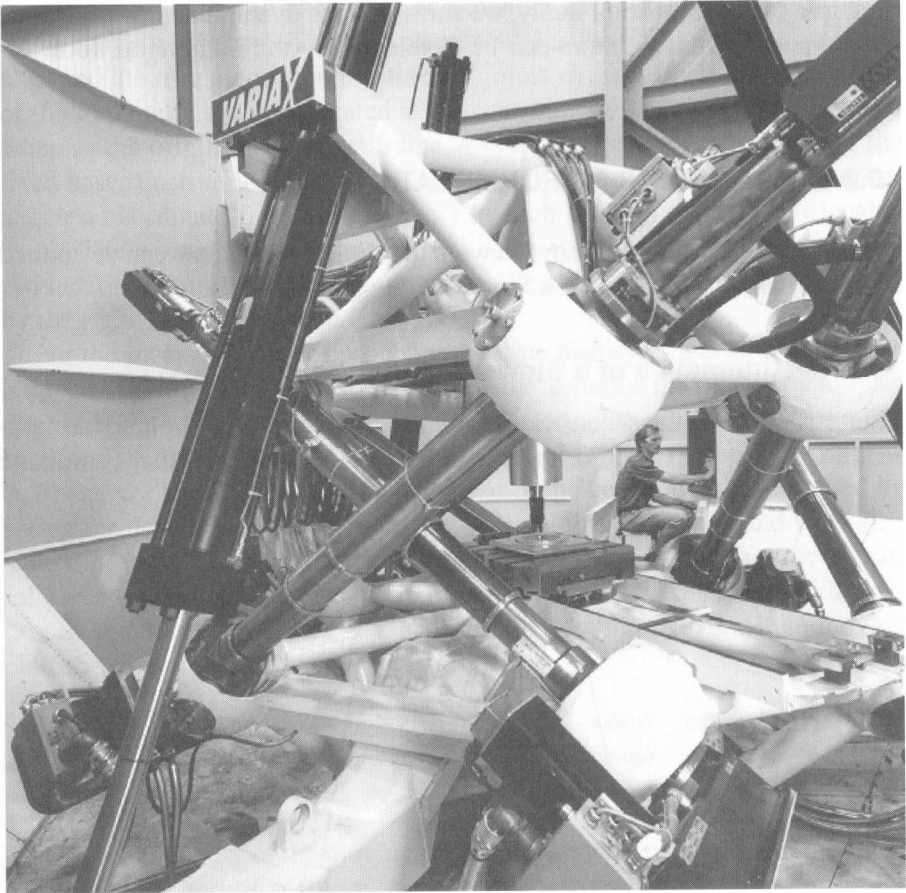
VARIAX[®] machining center. (Courtesy of Giddings & Lewis Machine Tools, Fond du Lac, Wisconsin.)
